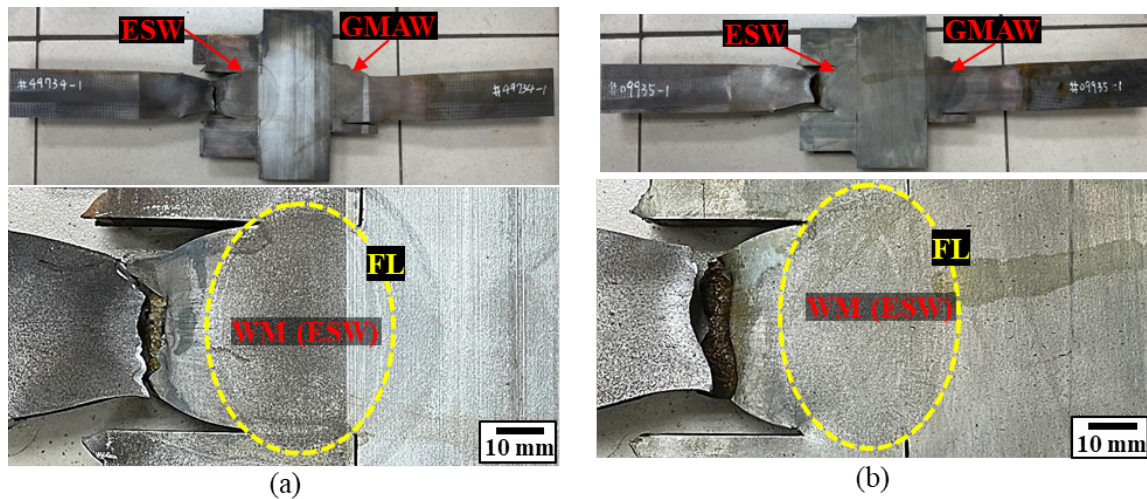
Fractured tensile specimens of (a) HTN and (b) LTN.
